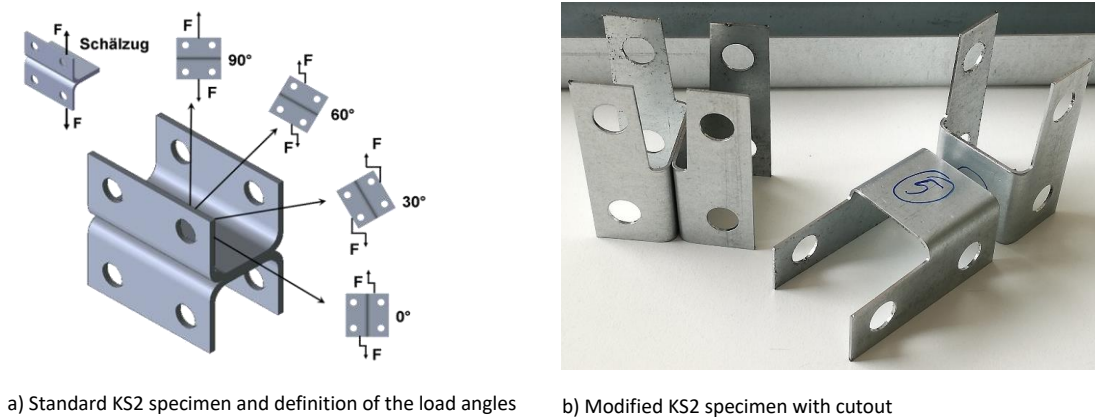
Modified KS2 specimens for testing edge welds
